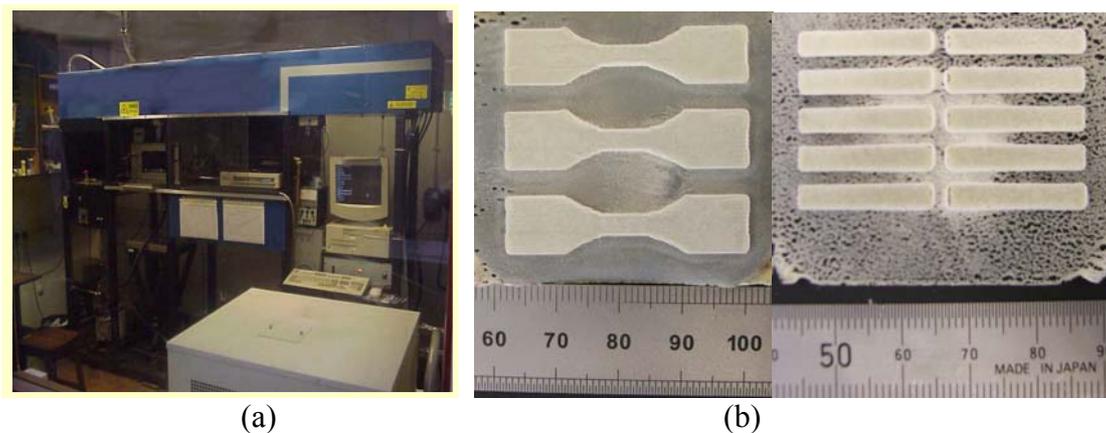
(a) CO<sub>2</sub> SLS experimental machine used to fabricate test specimen (b) Tensile and density test specimen.
